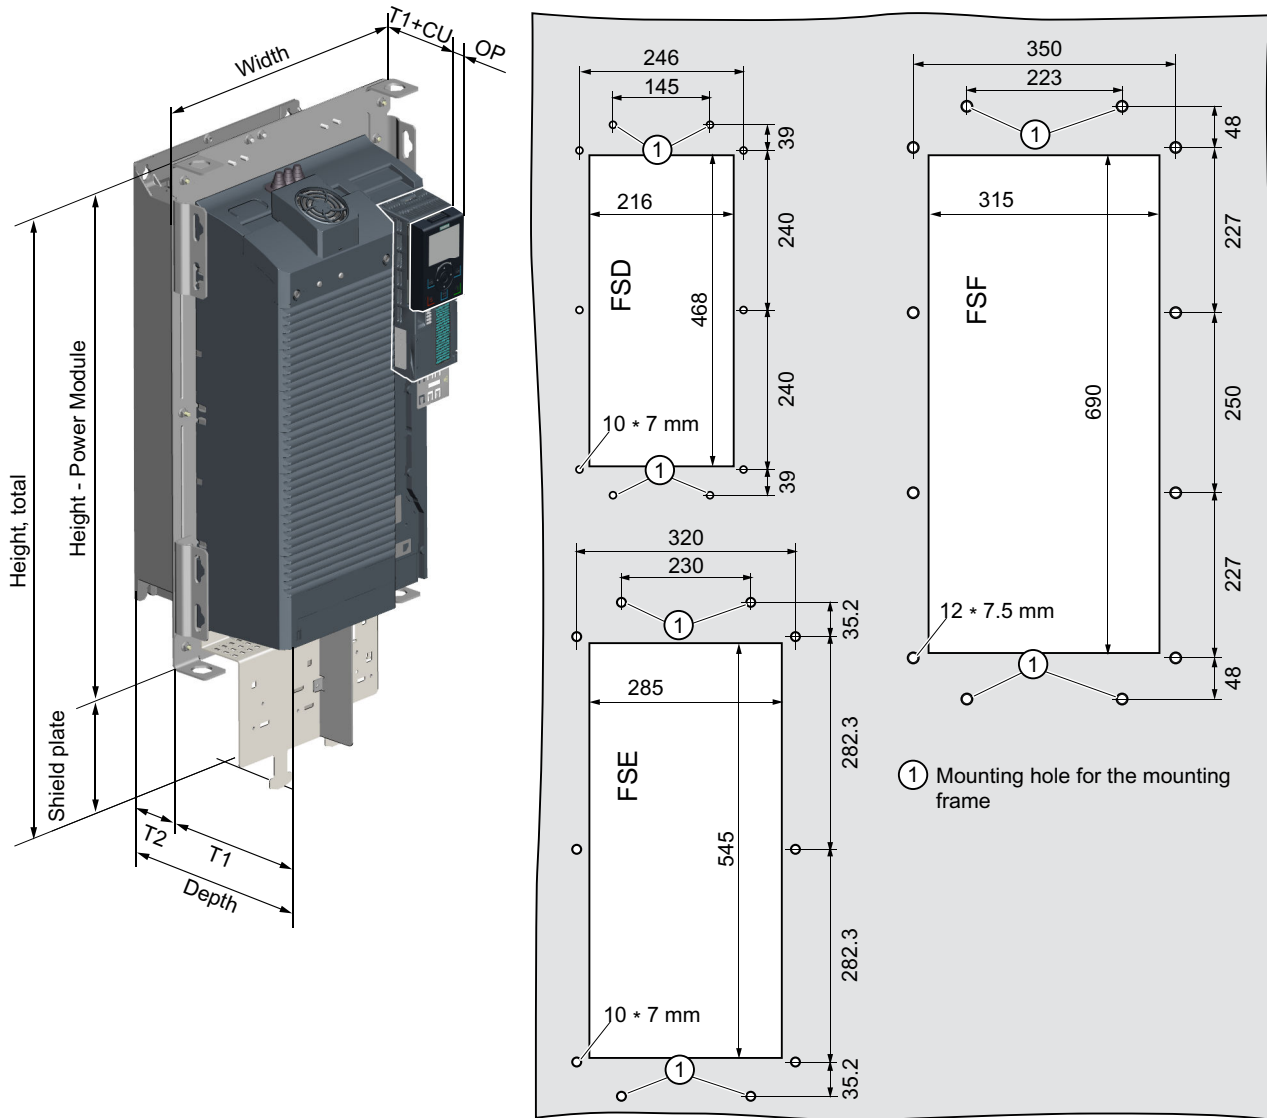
Dimension drawing and drilling dimensions for frame sizes FSD ... FSF
